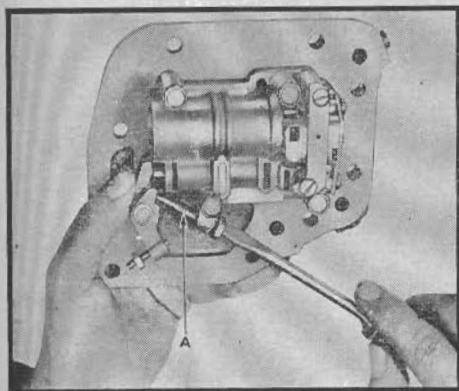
Setting (1) of throttle valve inner lever adjustment. 1953-59
